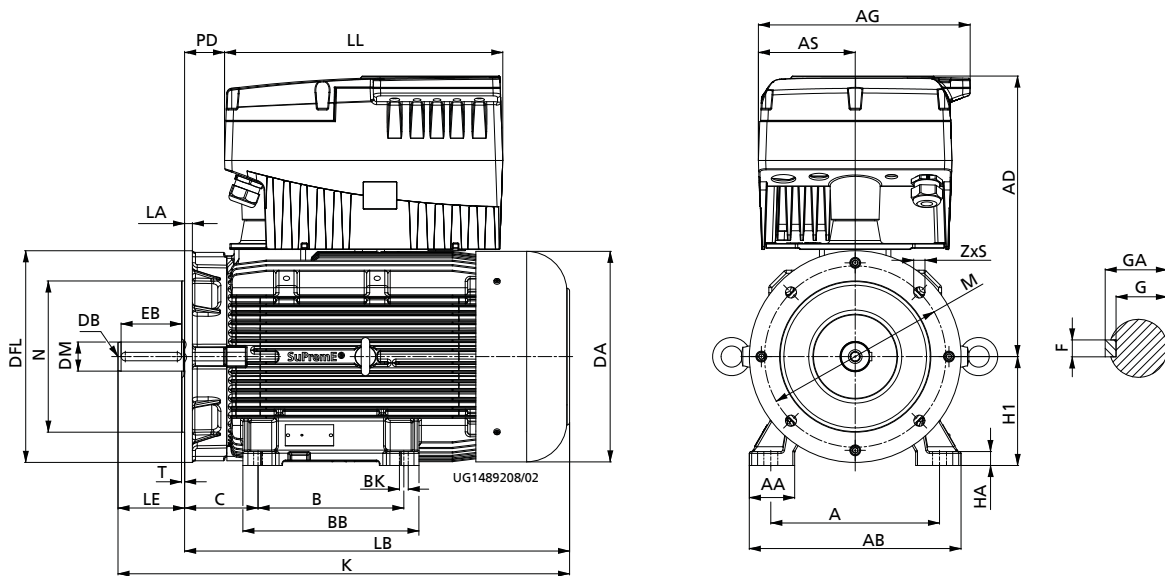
Version with FF flange with clearance holes (V15, etc.)
